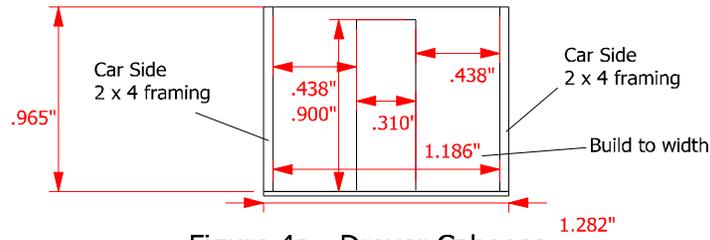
Drower Caboose end wall - dimensions expressed in 3 decimal places
